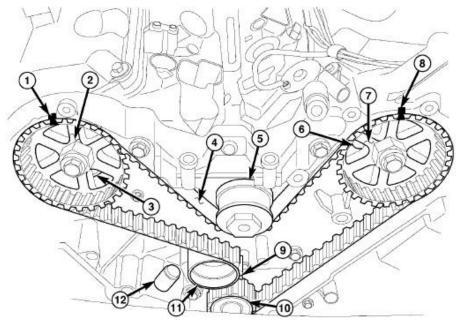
TIMING GEAR ALIGNMENT Courtesy of CHRYSLER LLC
